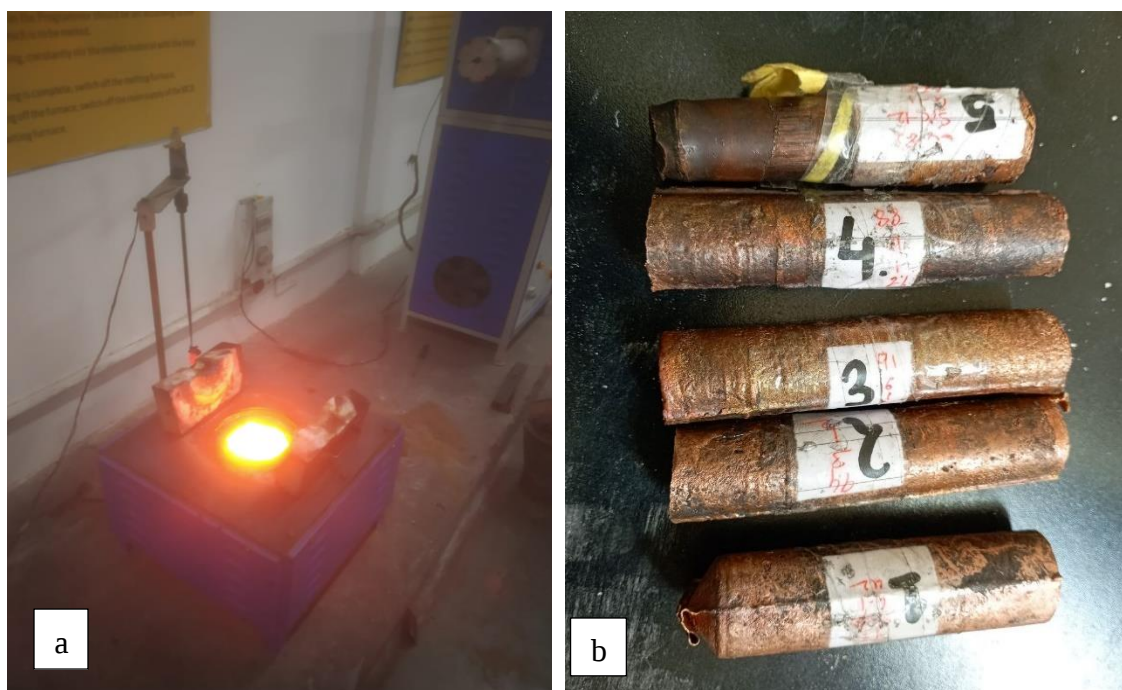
Fabrication of composites (a) stir casting setup (b) fabricated sample
